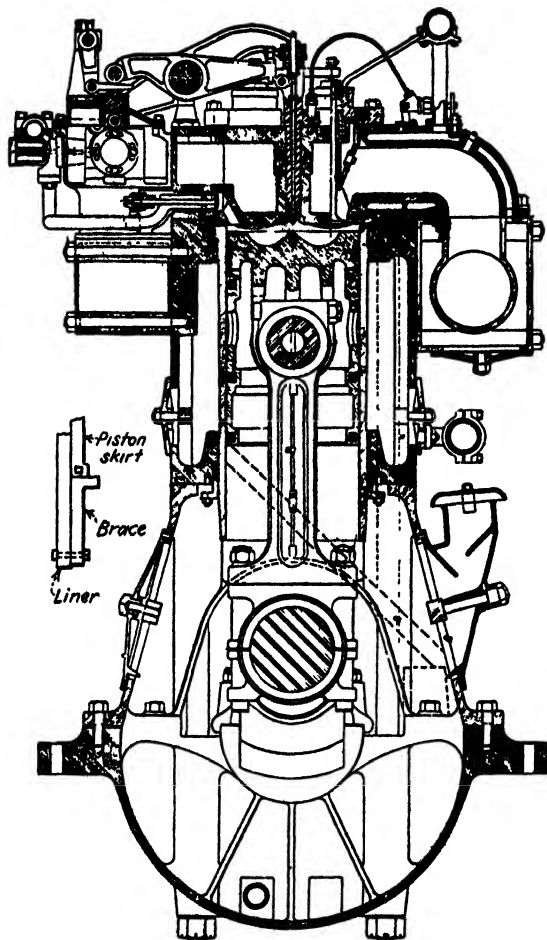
Section through Winton four-cycle engine, showing methods of supporting piston.
